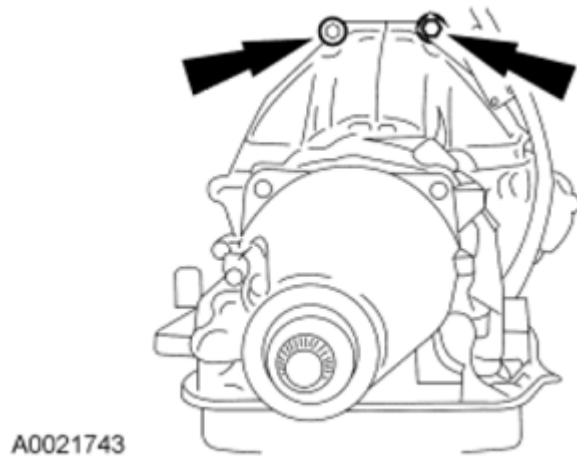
Identifying Engine Lifting Bracket (303-D088)
